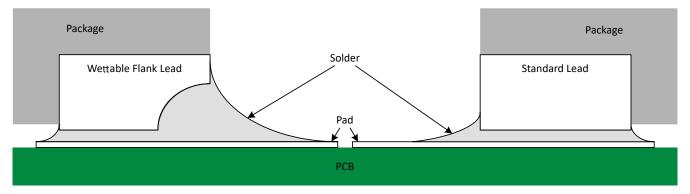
Simplified Cutaway View of Wettable-Flank QFN Package and Standard QFN Package After Soldering
